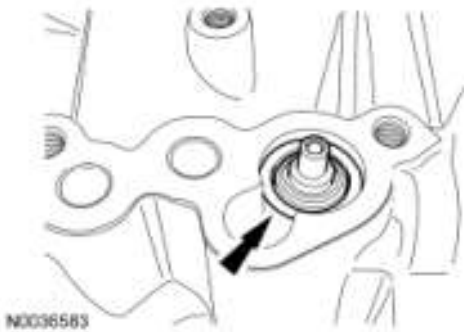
Locating Forward And Overdrive Clutch Assembly
